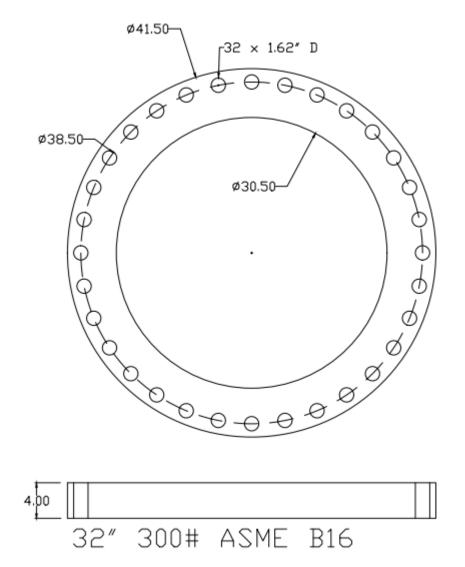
Dimensions of top flange on 7.76 m<sup>3</sup> explosion vessel.
